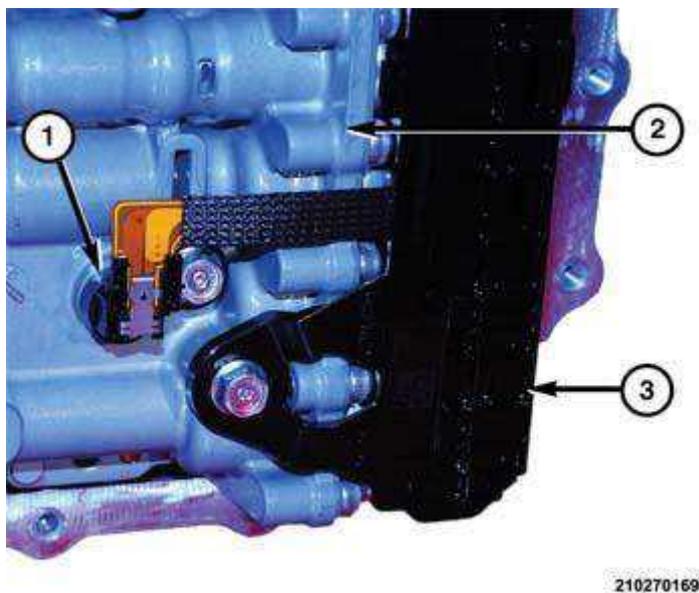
Fluid Temperature Sensor, Valve Body & Bolt
